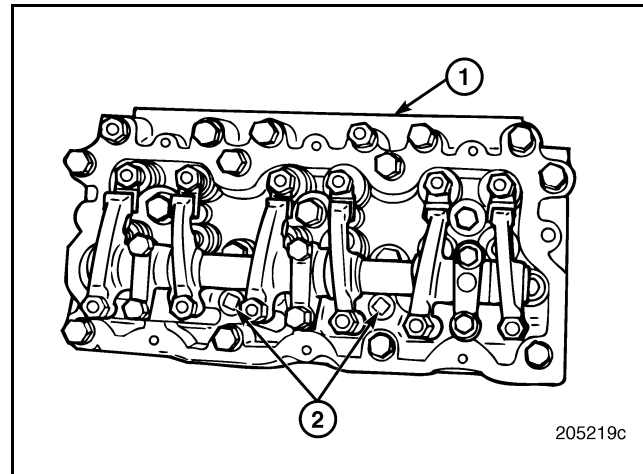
Cylinder Head Pipe Plugs (3/4-Inch NPT)
